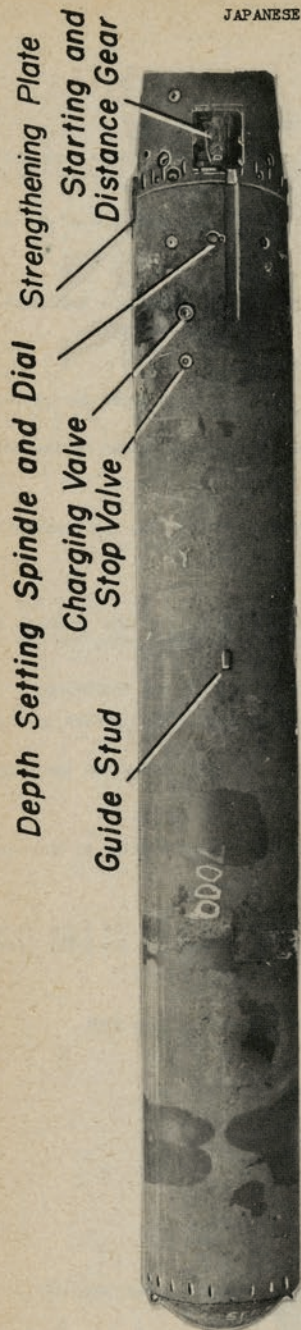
Torpedo Type 44 Mark 2 Mod 1, Flask Section, Top View
